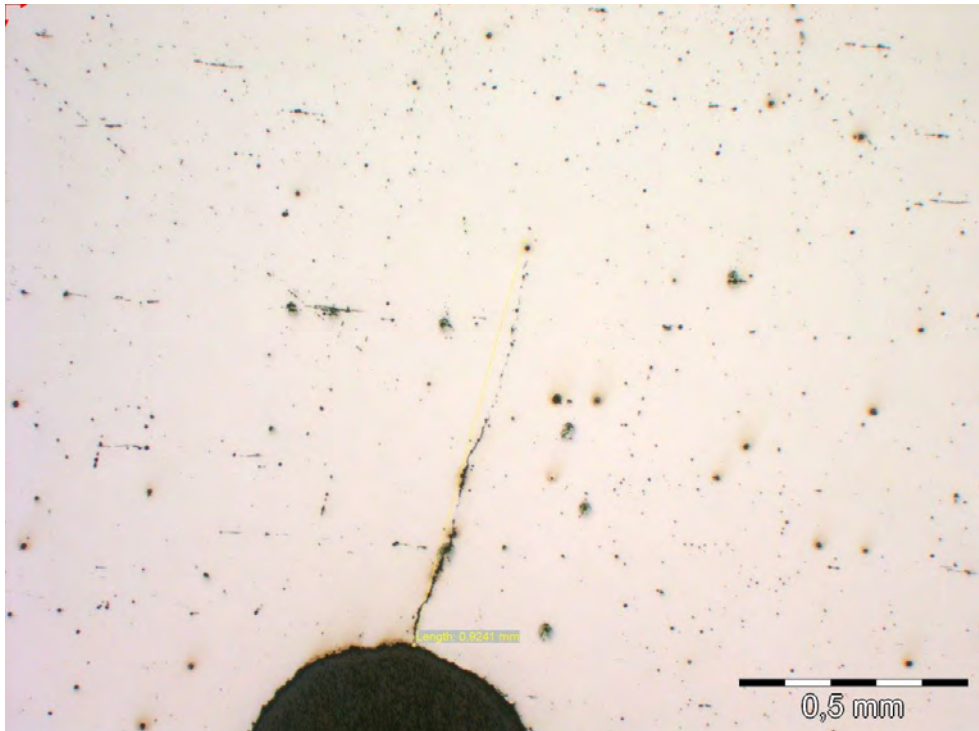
Cut two in crack at segment C, second ridge on barrel no. 14389
